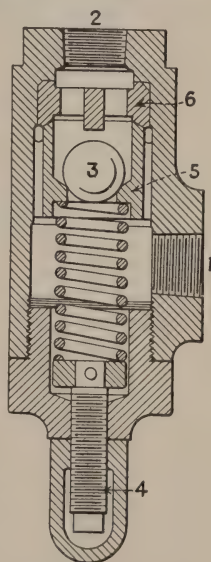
Spring-resistance valve or "foot valve." Oil returning through (2) must force (5) downward against the spring and thus make an opening between (5) and (6).
